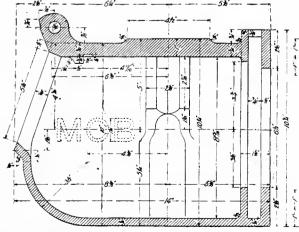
Standard Journal Box Lid and Pin for Journal 3¾ in. x 7 in. Sheet 3.
